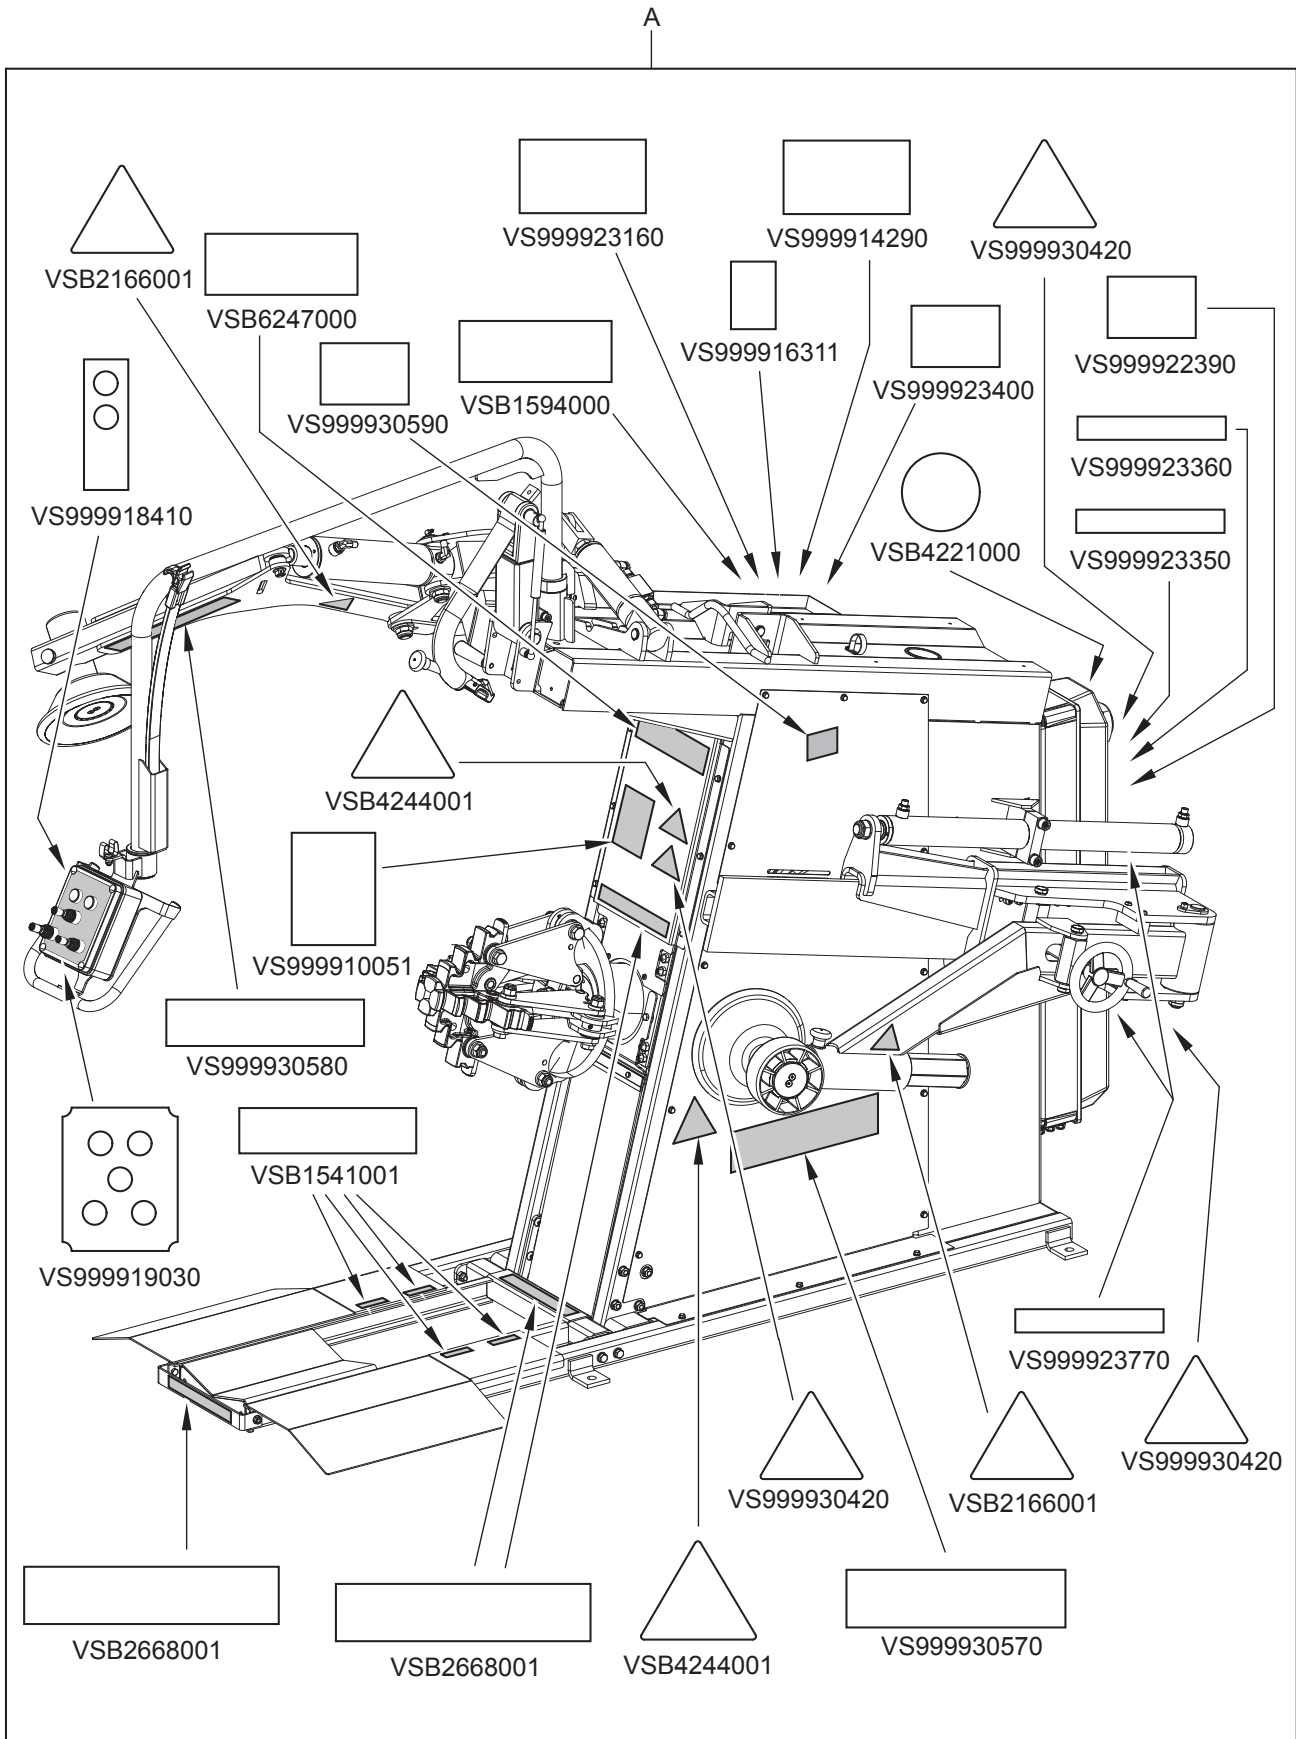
Rev. 2			VS750490690			→	←
